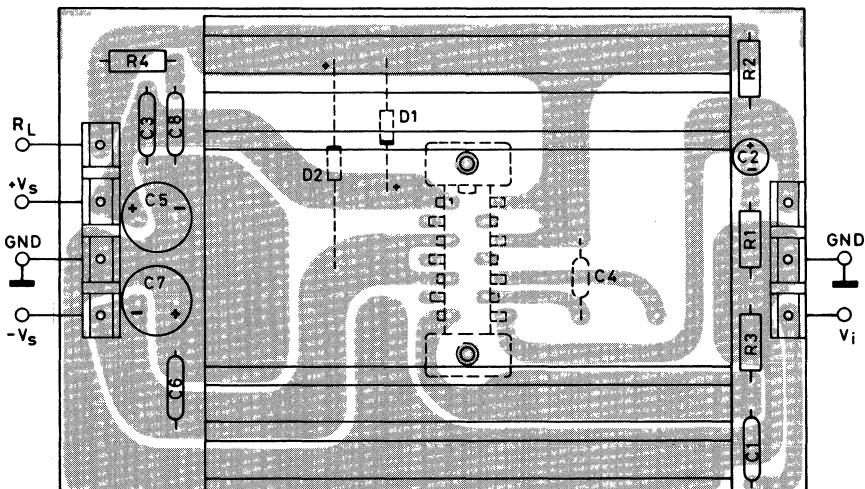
P.C. board and component layout for the circuit of fig. 16 (1:1 scale)
